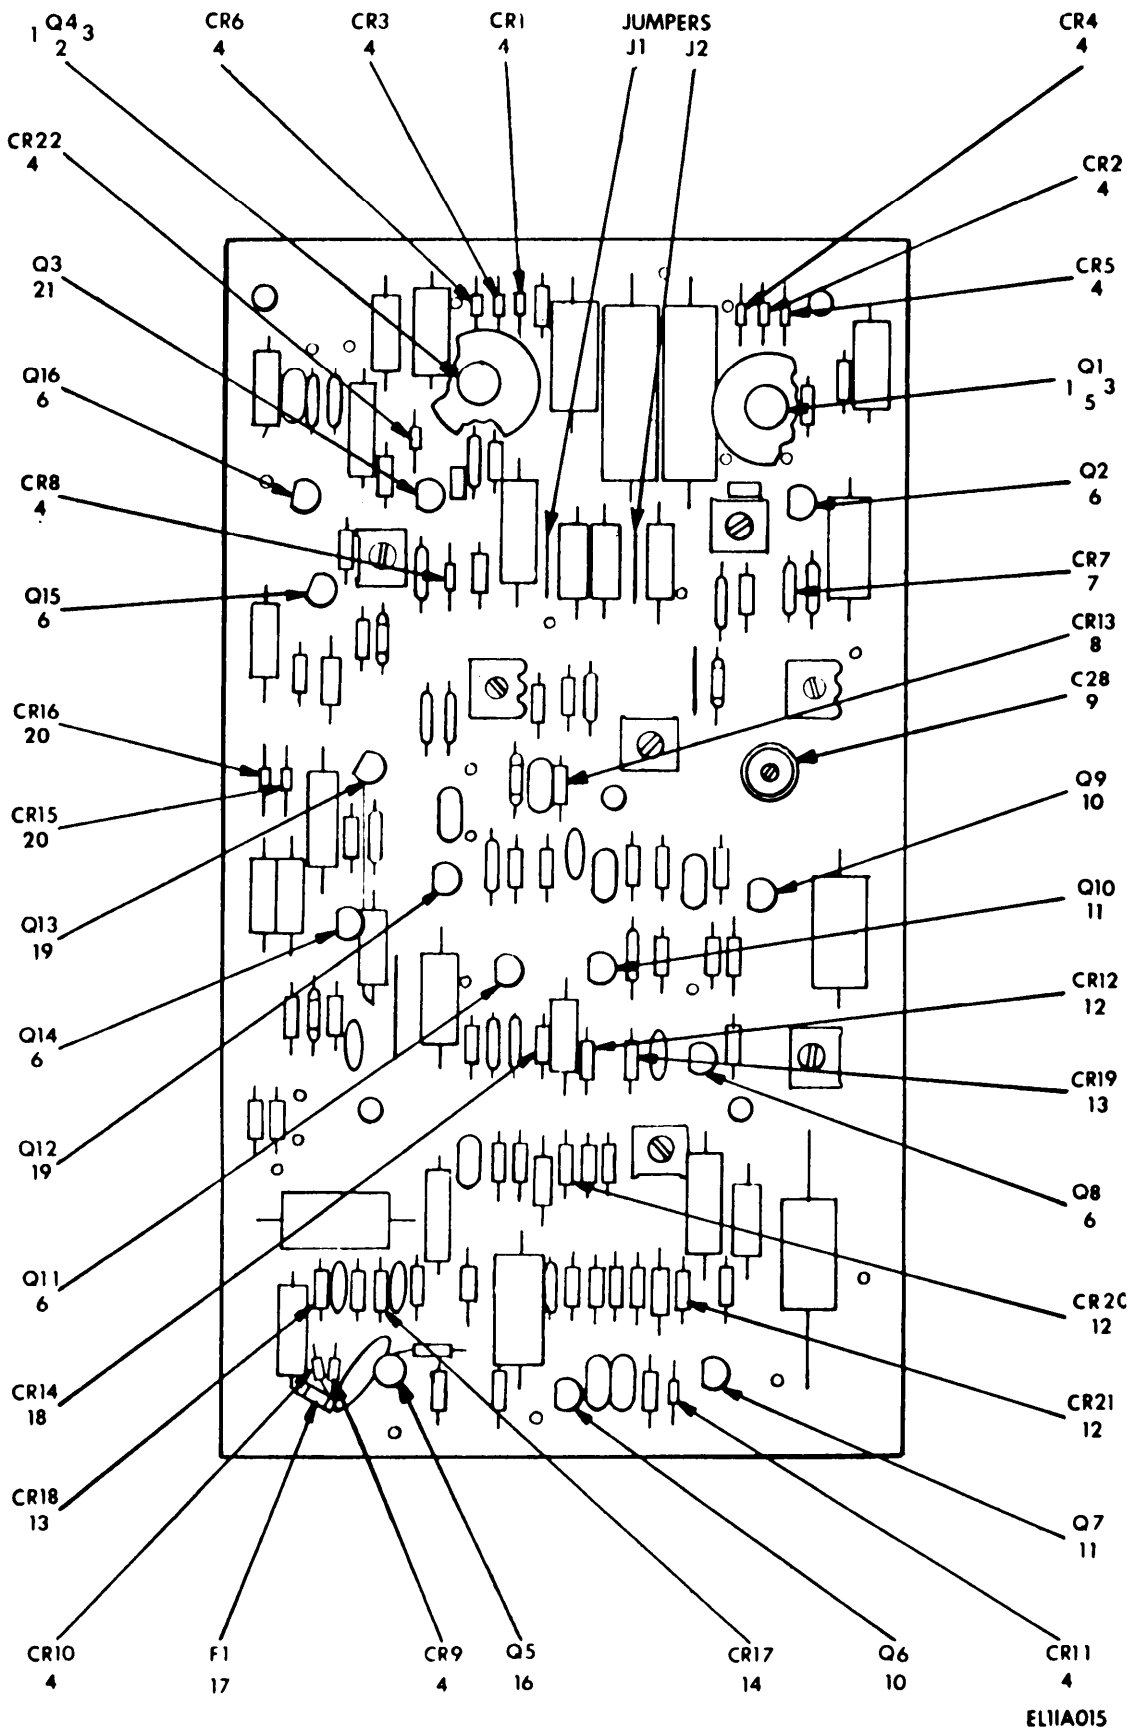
Circuit board assembly A2, transistor and diode location diagram.
